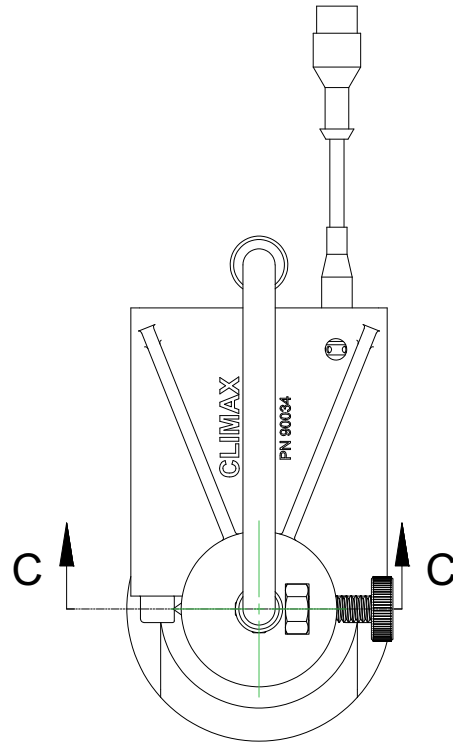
DIGITAL LEAKAGE MEASUREMENT SENSOR ASSEMBLY (P/N 98873)
